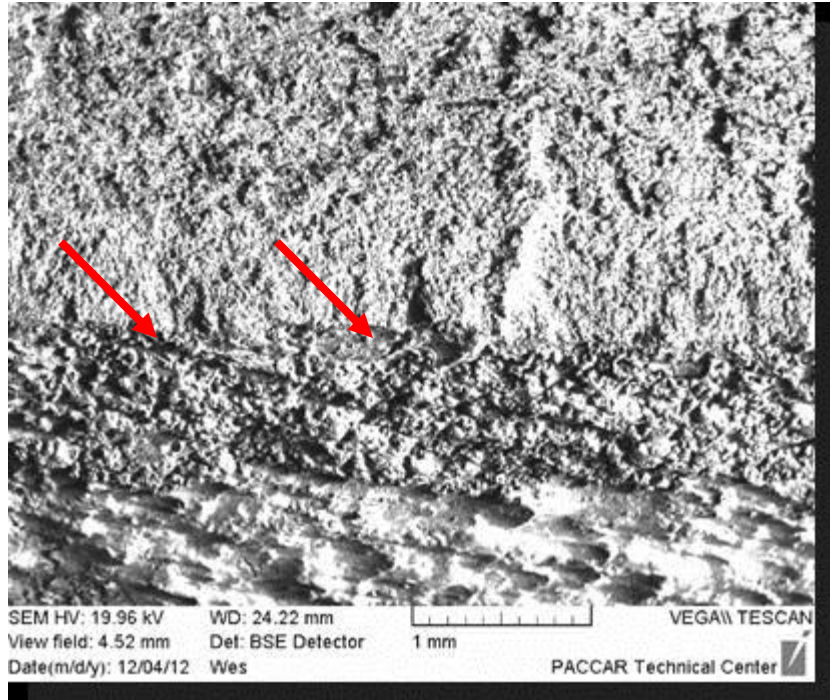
Weld Toe for Sample 23 (Suspended without Failure at 2,000,000 cycles)
